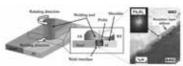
Friction stir welding between aluminum and steel.
